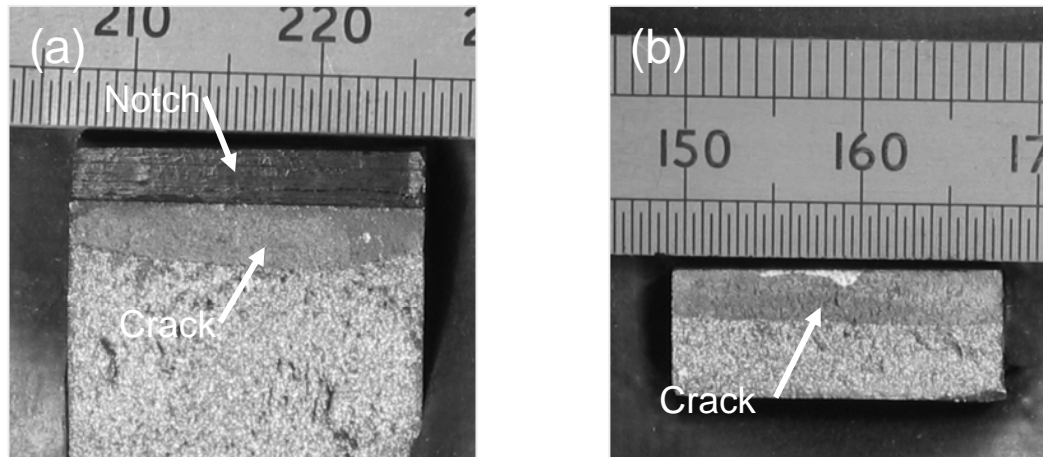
(a) Cracked cross section of specimen S-1 (used in VAM) after breaking the specimen in two halves. (b) Cracked cross section of specimen T-1 (used in thermosonics) after breaking the specimen in two halves.
